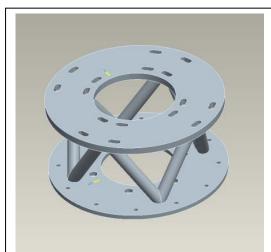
Pedestal final Design, showing 16 bolt holes t mid-height flange.
